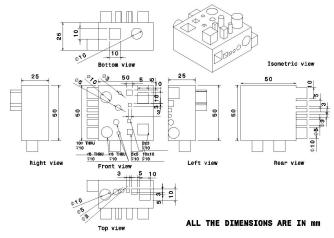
Drafted Test Specimen (Tolerance Gauge) 3D model in CATIA
